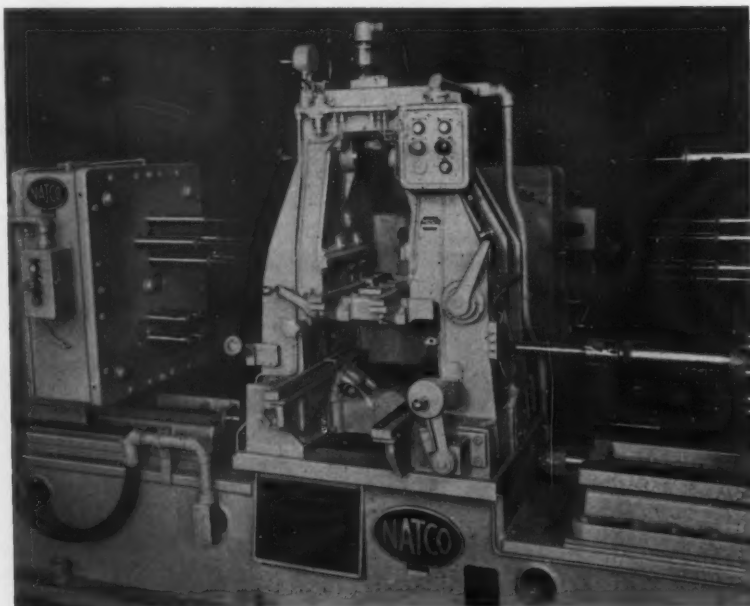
Trunion fixture is ideal for chip disposal. Parts rotate through 180 degrees so that chips fall out into machine base.
